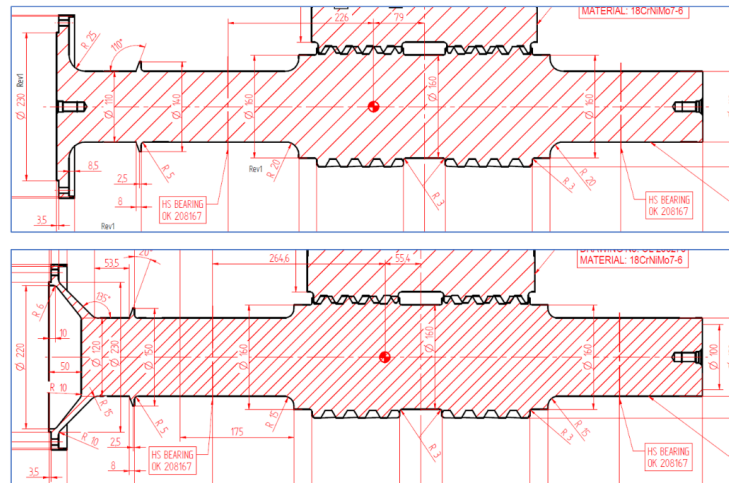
The cross-section of the initial pinion shaft (above) and the modified pinion shaft (bottom).
